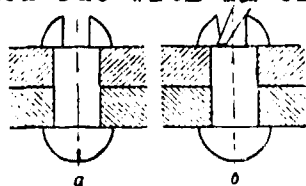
Cutting Off a Rivet Head: a - groove has been cut; and b - trimming off the remnants of the rivet head.
